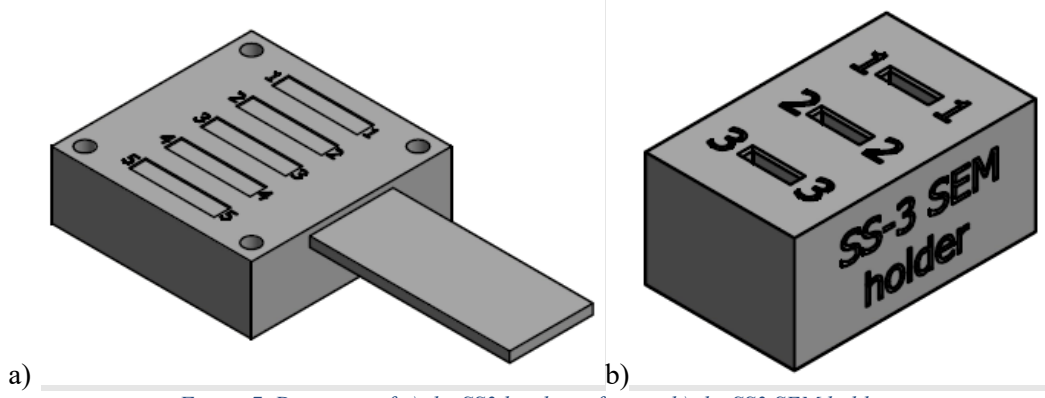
Drawings of a) the SS3 hardness fixture, b) the SS3 SEM holder
